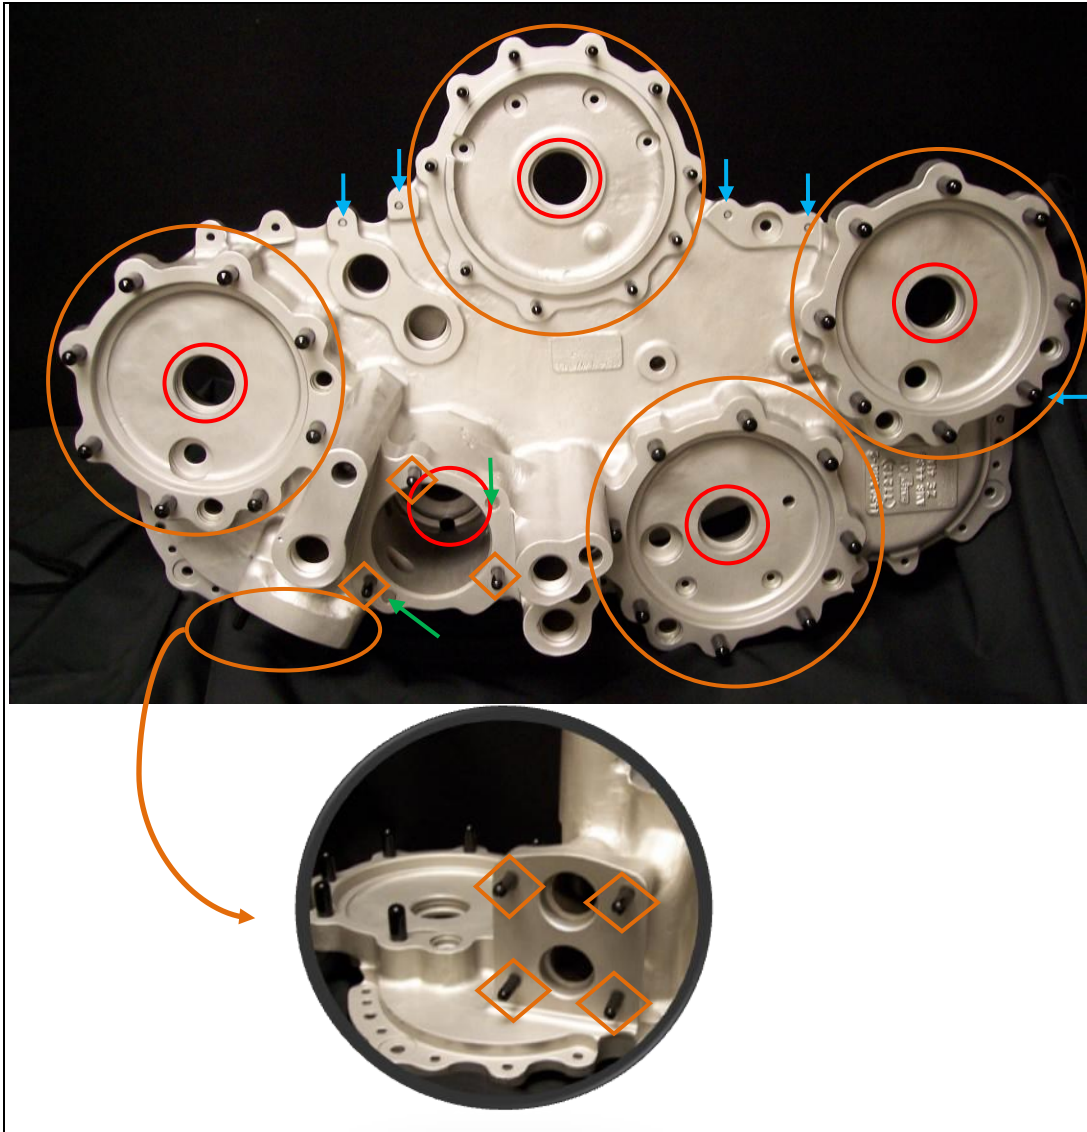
H-47 accessory cover – top contains 41 threaded studs, 5 bearing races with through holes, 2 inserts, and 5 stud bottoms for UV maskant.
